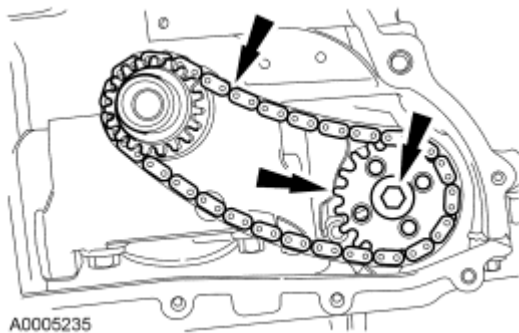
Locating Oil Pump Chain, Sprocket & Bolt
